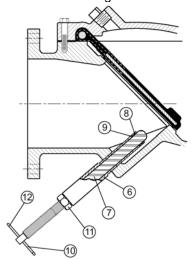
BACKFLOW ACTUATOR ASSEMBLY
